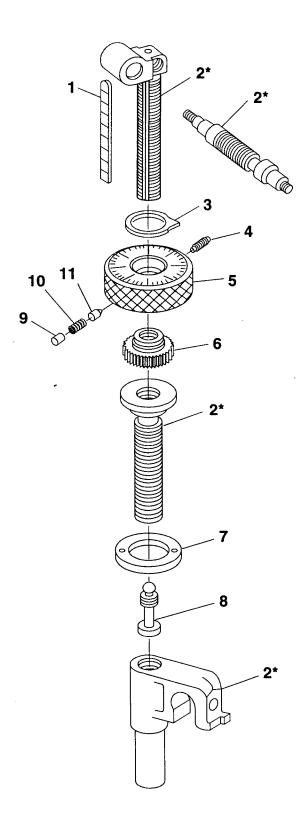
Elevating and Traversing Mechanism Assembly (Traversing and Clamping Unit), 7791119
